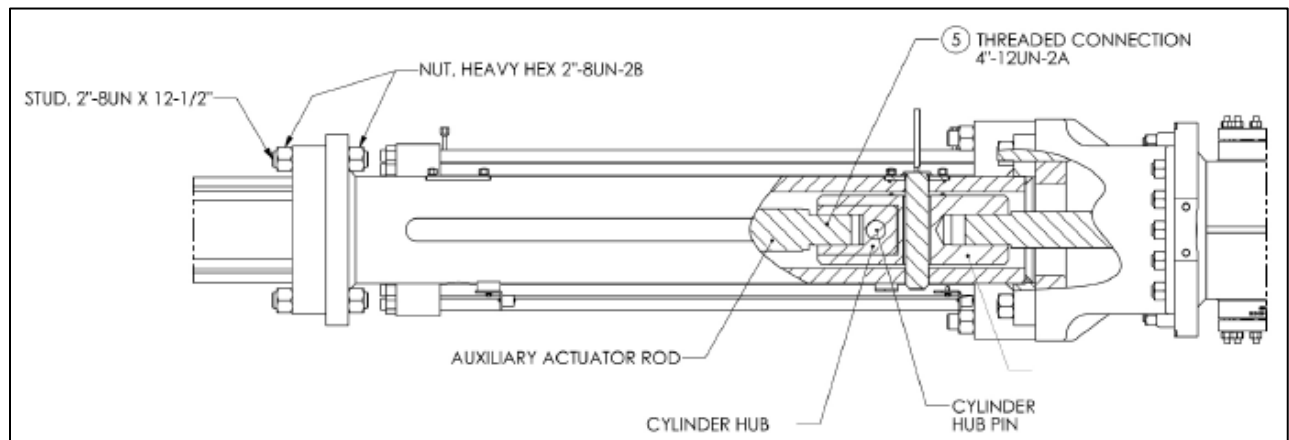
Auxiliary Actuator to Lockout Tower Connection
